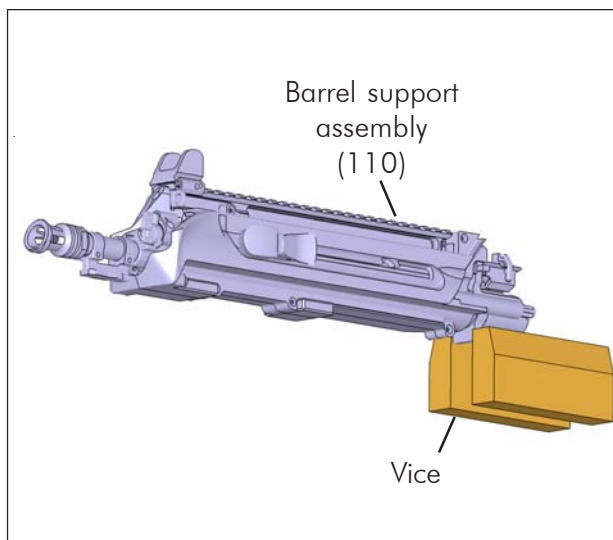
b - Installation of the barrel assembly (110) into a vice
